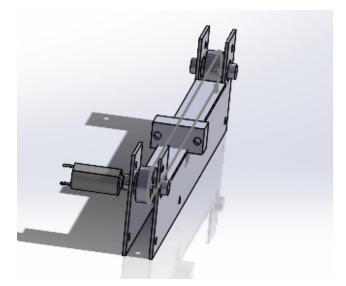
This is the preliminary figure for this device. Some components cannot be shown detailly in this are the motor bracket, the specific motor will be used in this, and the track under the mass.
